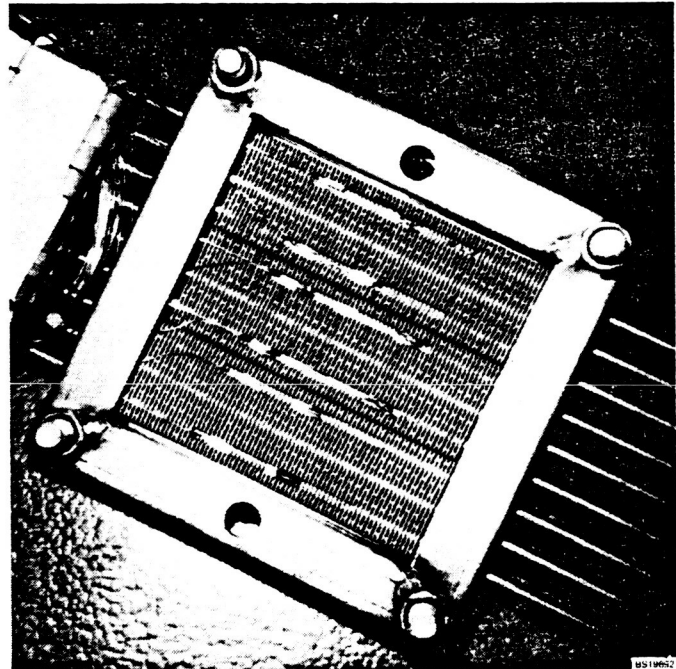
DMR Test Section of Mod I Rear Row Finned Tubes
